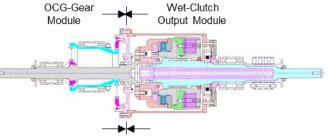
Configuration 3: OCG Gear / Wet-Clutch.
